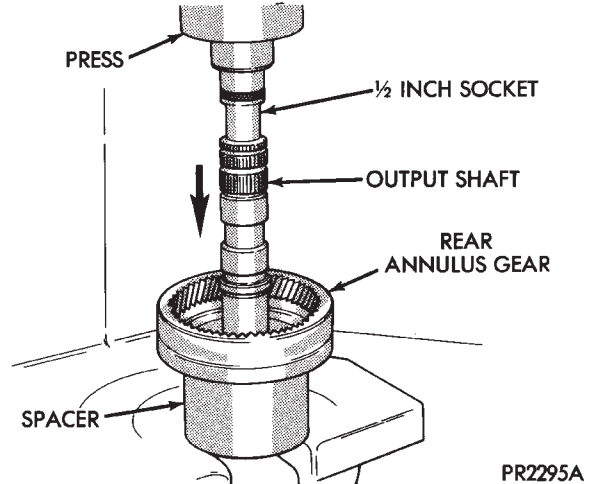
Install Output Shaft into Rear Planetary Annulus Gear
